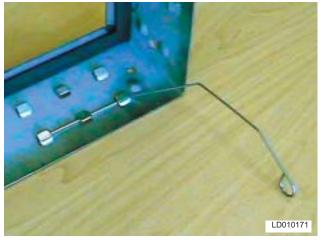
CORRECTLY INSTALLED LATCH P/N 315-004-003.
